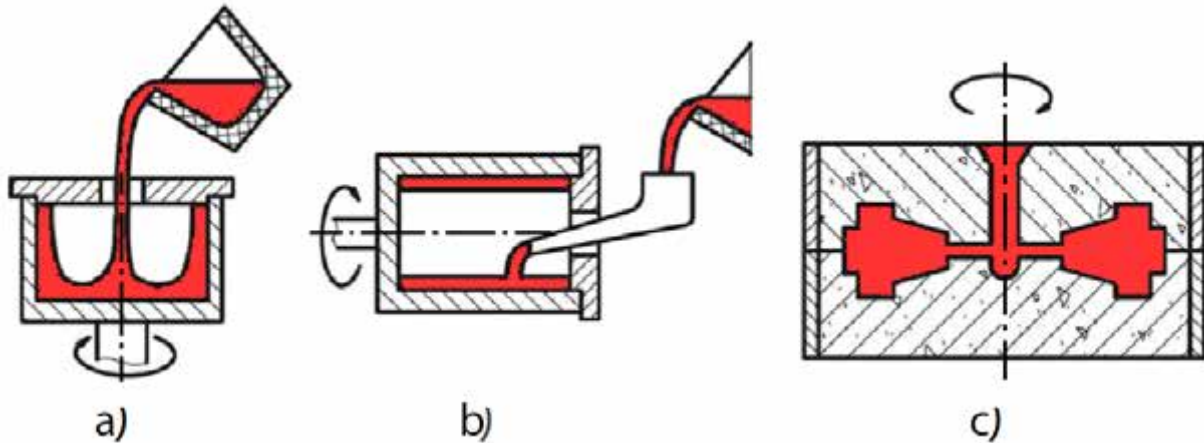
Schemes of centrifugal casting equipment's work: a) with the vertical axis of rotation; b) with the horizontal axis of rotation; c) for casting by centrifugation method
